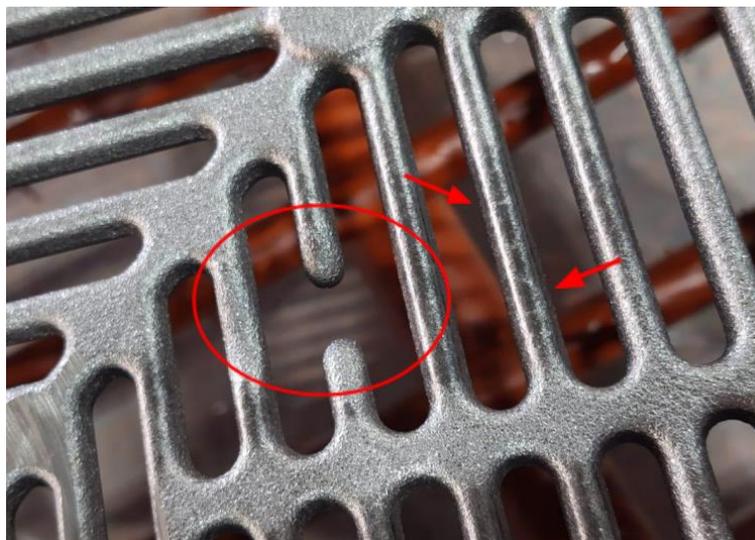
Cold shut and misruns defects in the casting part.
